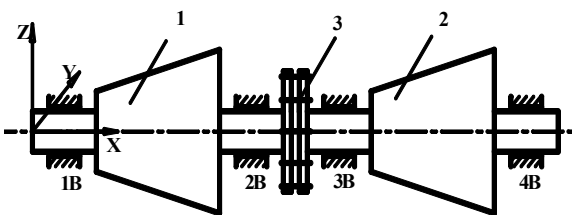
Rotor and bearing system: 1 – high pressure cylinder rotor (HPR); 2 – medium and low pressure cylinder rotor (MLPR); 3 – nonlinear flexible coupling (NFC); kB – journal bearings, k=1,...,4
